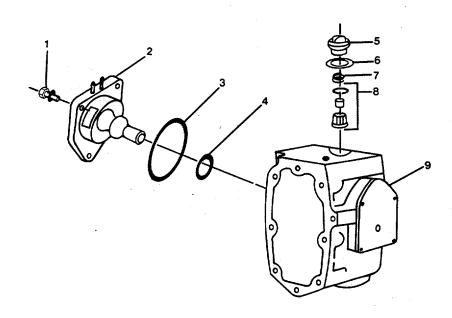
<u>Fuel Pump Electric Governor Actuator and Fluid Filter</u> <u>Element Assembly.</u>
